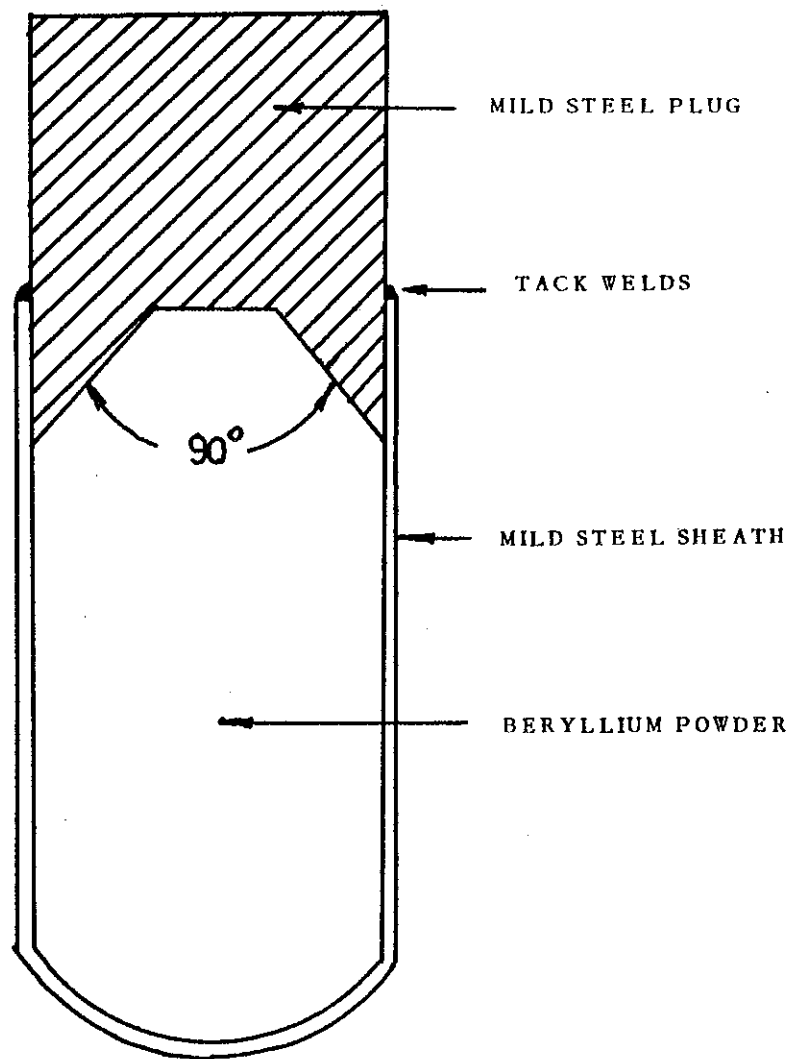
SCHEMATIC ARRANGEMENT OF BILLETS FOR EXTRUSION
